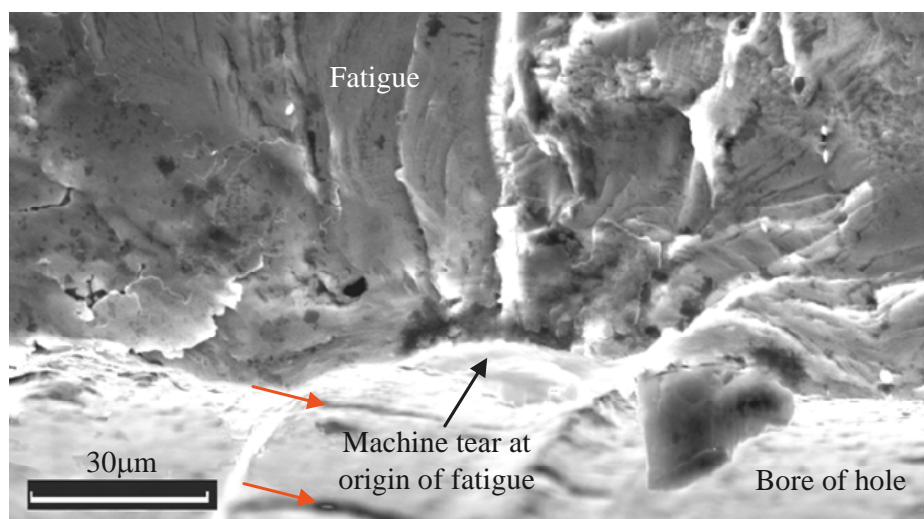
Fatigue cracking initiating from a shallow long surface groove combined with a machining tear in an AA7050-T7451 coupon.
